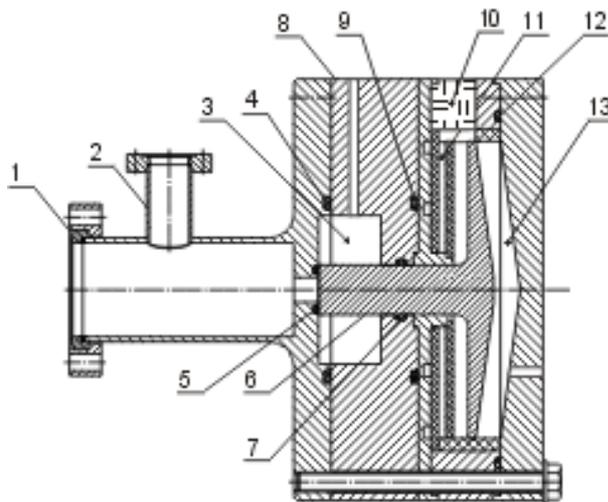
Cross section drawing of the fast valve. 1 – CF 35 flange; 2 – pressure measurement flange; 3 – working reservoir; 4, 5, 7, 9, 12 – o-rings; 6 – piston; 8 – case; 10 – HV coil input (filled with epoxy); 11 – coil; 13 – closing gas volume.
